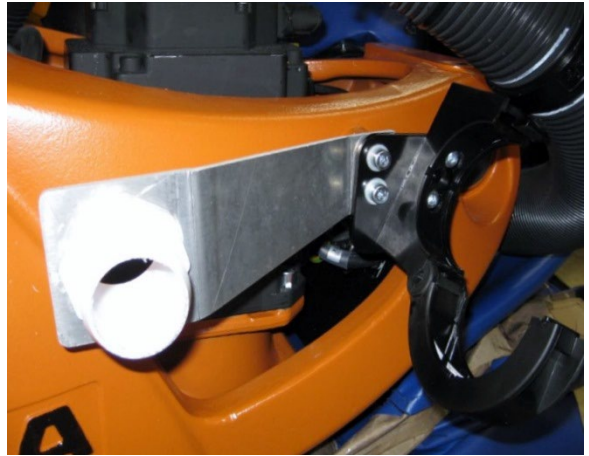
Remove the clamp, and slide bracket behind. Reattach
